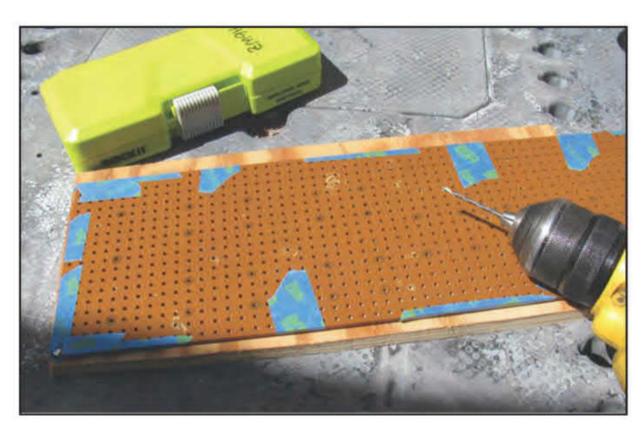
Photo G. I use perforated materials, like this old-time prototype board, as jigs to ensure multiple holes are lined up exactly right, without measuring and marking.
